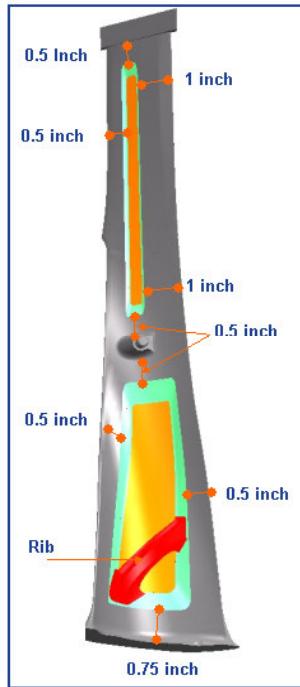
33.5H Hybrid: Pocketed Blade Design
